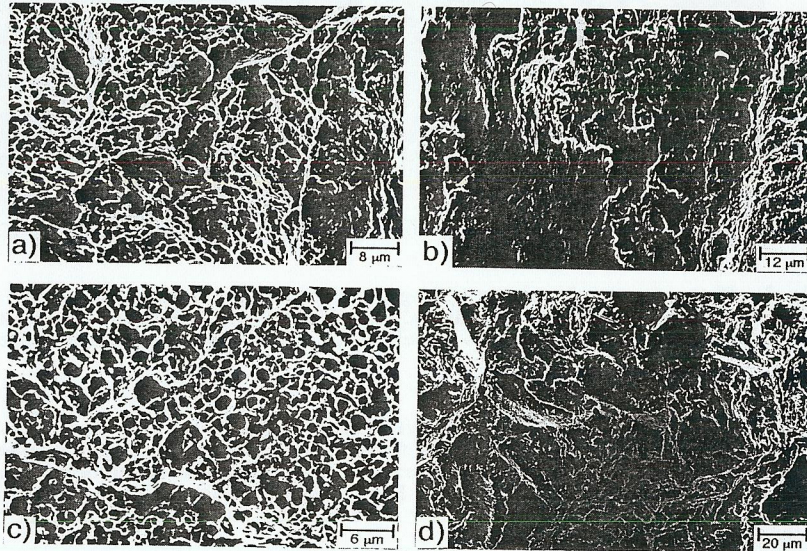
Fracture morphologies of HAC cracking in high hydrogen weldments. a) fracture appearance near crack initiation site; b) fracture associated with grain boundary ferrite along columnar grains; c) fracture associated with fusion boundary; and d) fracture associated with coarse grained HAZ.
